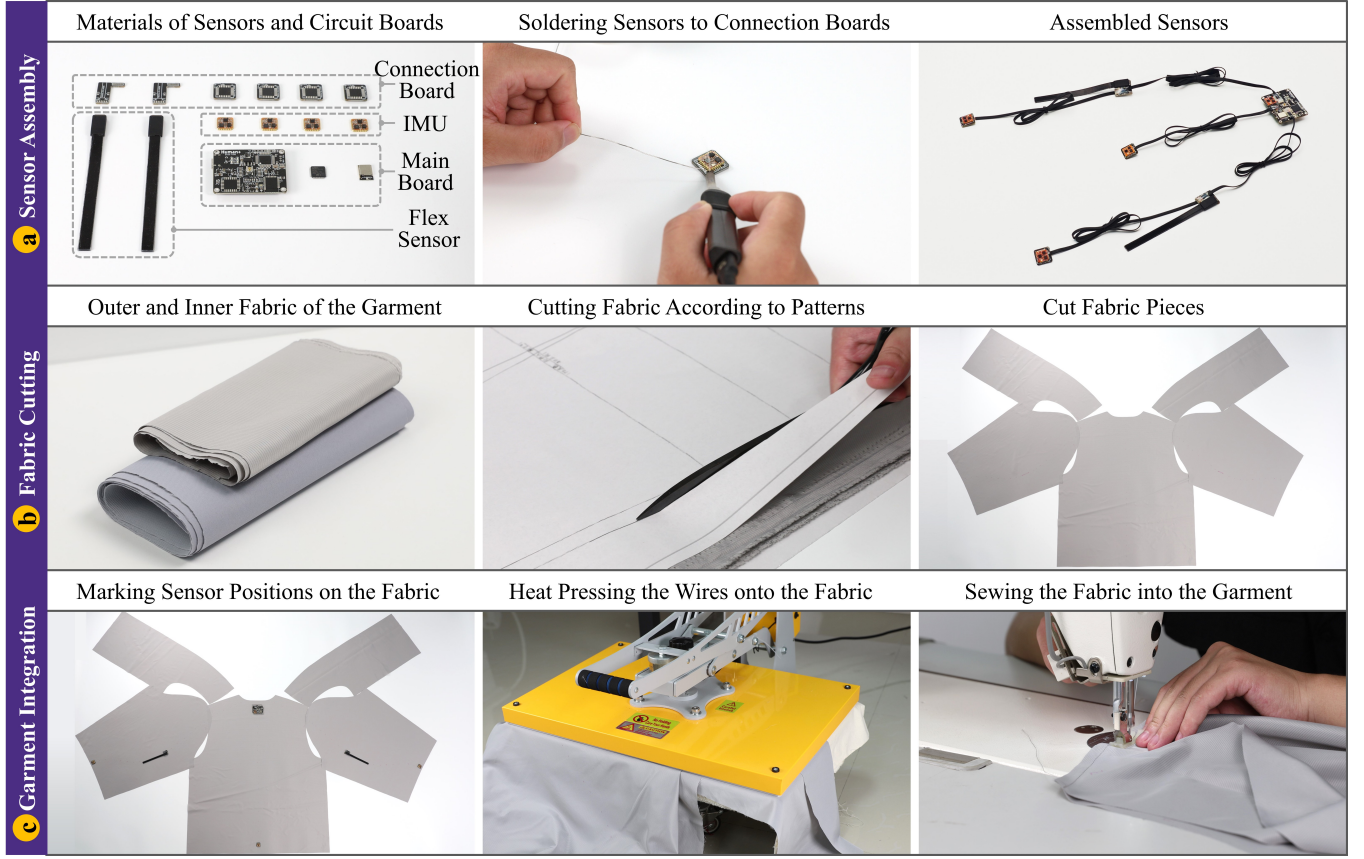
The process of prototyping: (a) Assemble the sensors together by soldering; (b) Cut the fabric into pieces according to the patterns; (c) Integrate the assembled sensors into the fabric through heat pressing and sew the fabric into the garment.
